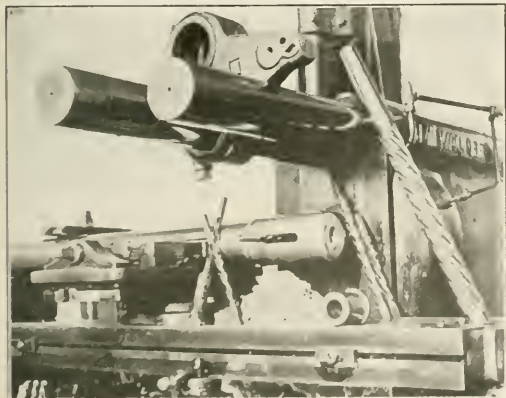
Modern Plain Knee-Type Miller Cuts Piston Rod Keyway in Record Time
